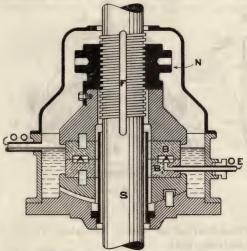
Vertical Suspension Oil Pressure Bearing (see page 256).\
